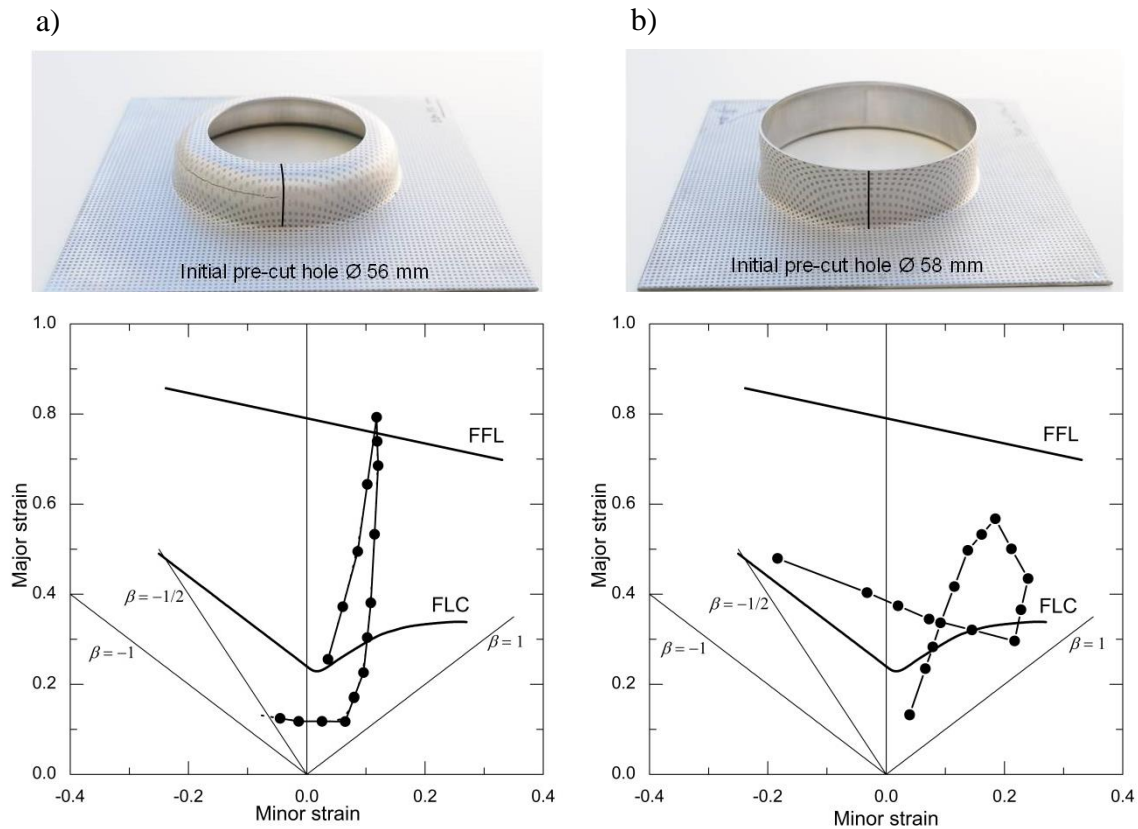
Hole flanging tests with pre-cut holes 56 mm (a) and 58 mm (b) diameter respectively and tool of $\phi 20\text{mm}$. Specimen pictures (top). Evolution of principal strains along the flange in the fractured and successful specimens (down).
